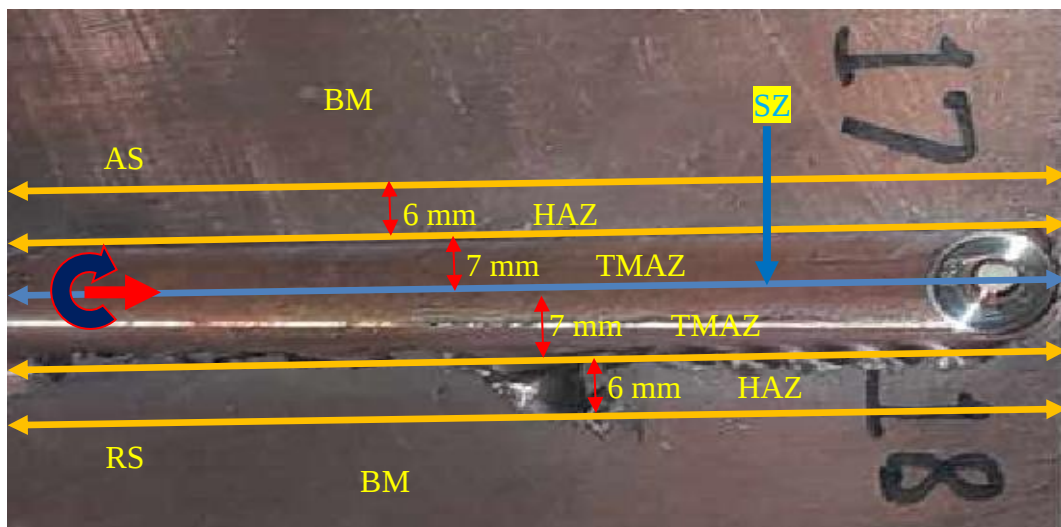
Basic sides of friction stir welded joints from welded center
